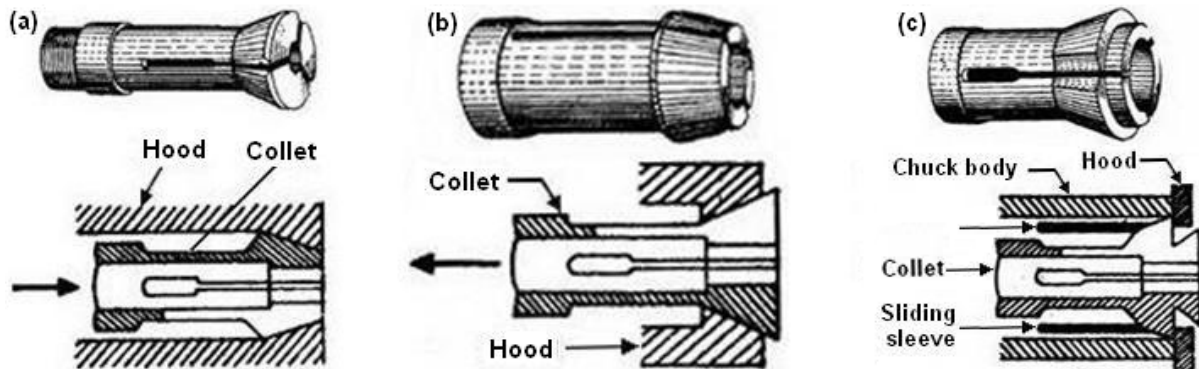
Collet chucks (a) Push out type (b) draw back type (c) Dead length type
